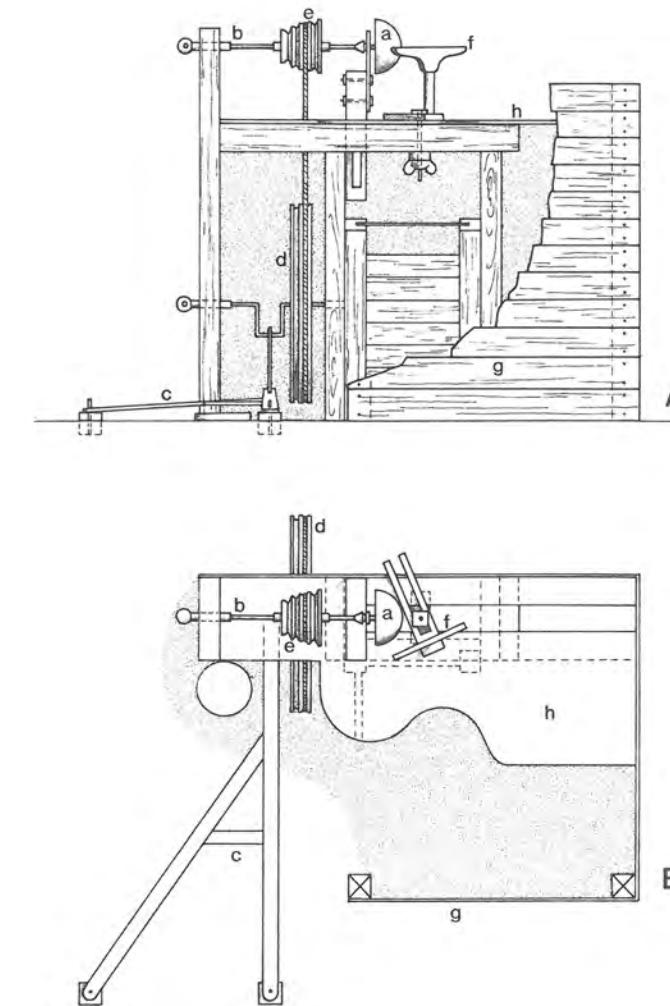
A, Profile and B, Plan of Horizontal Lathe:
